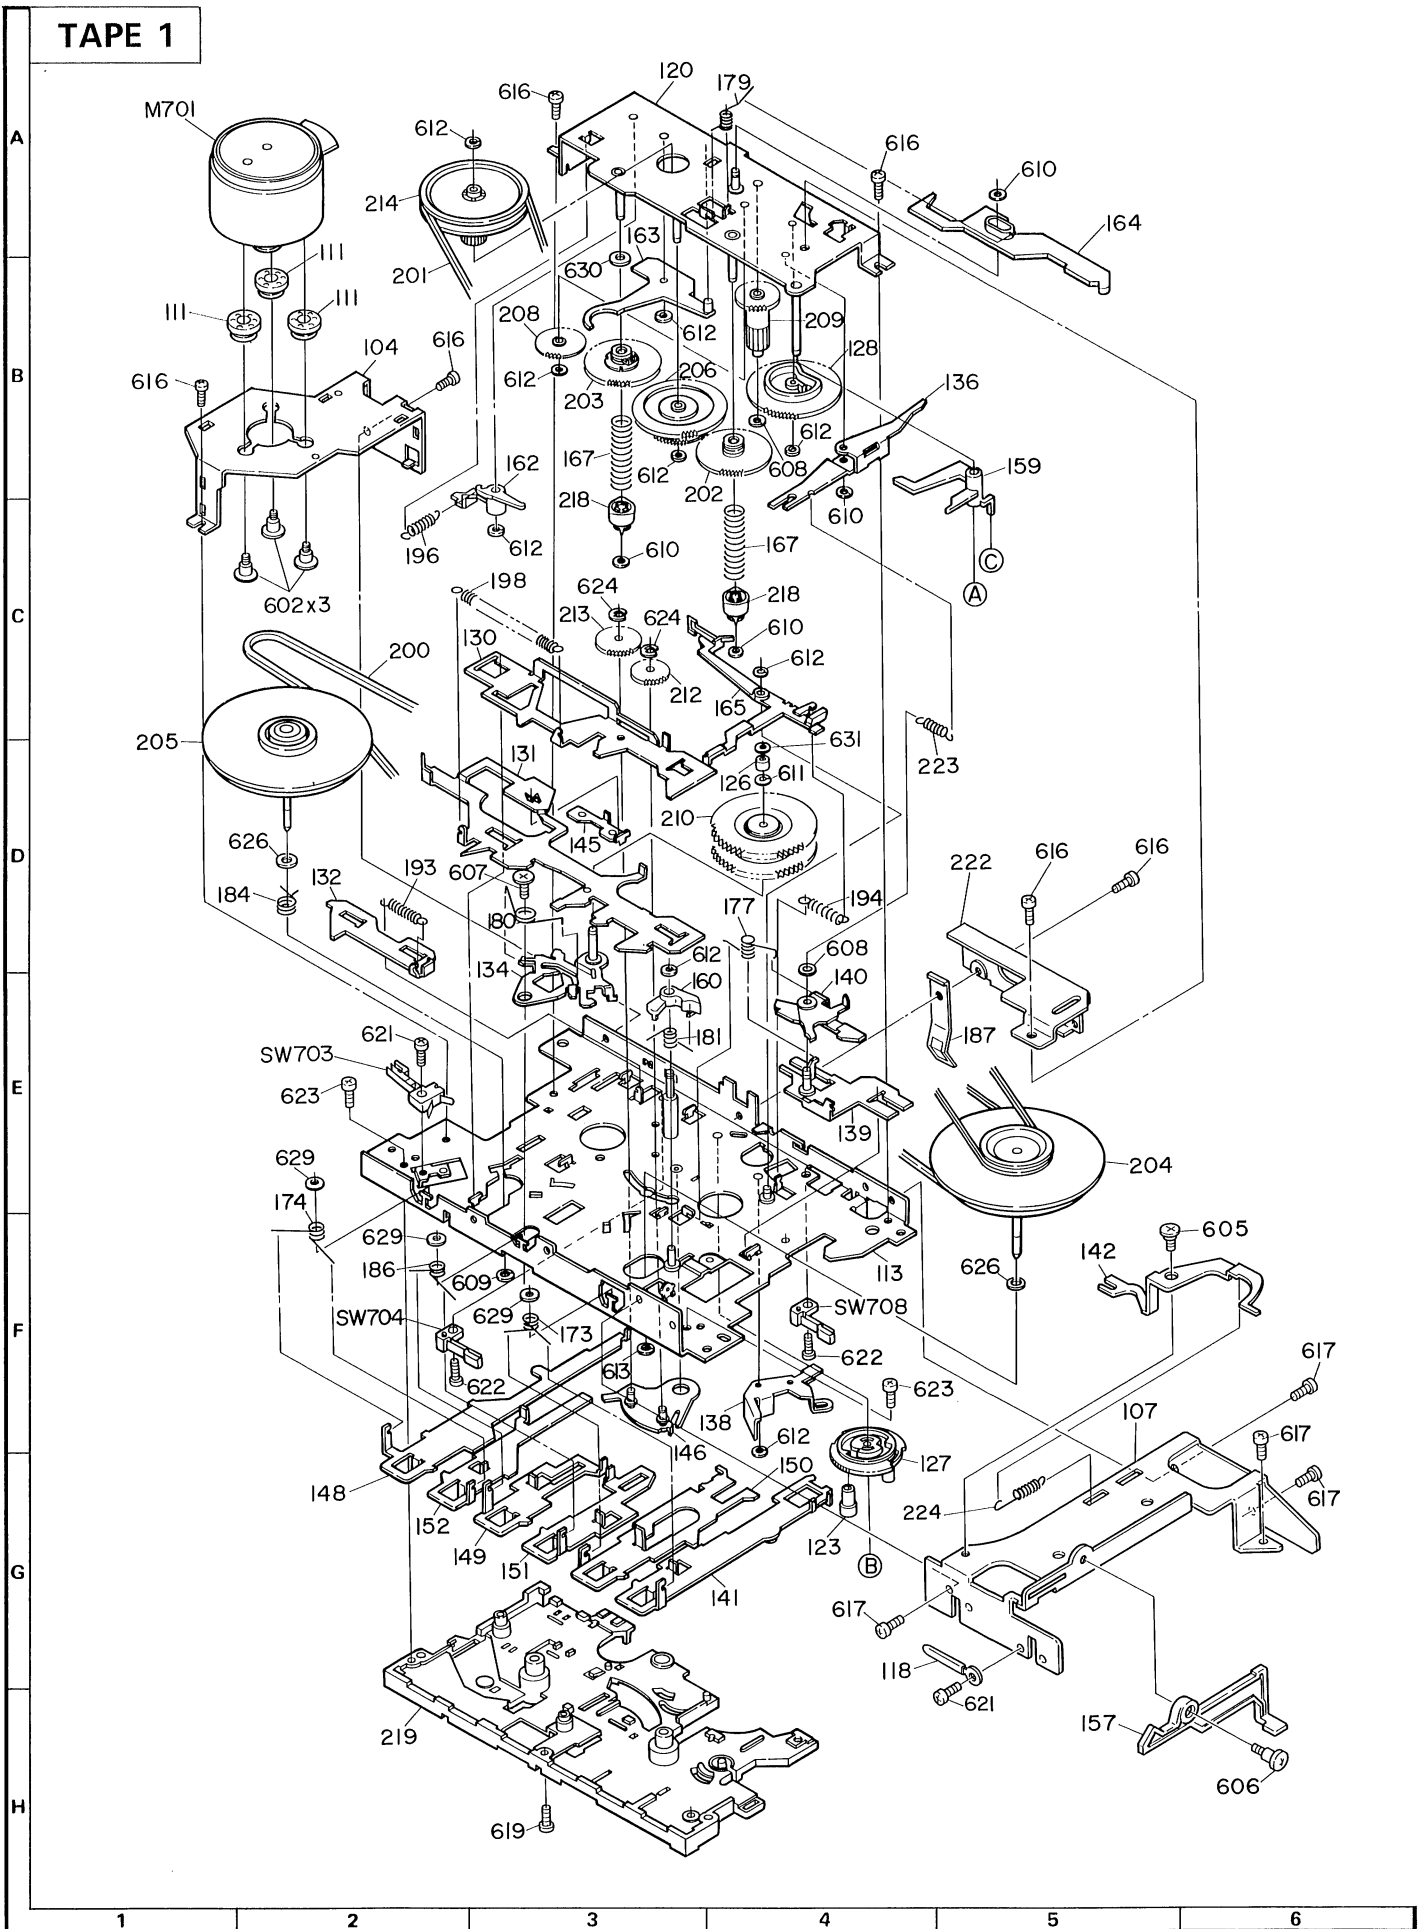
TAPE MECHANISM EXPLODED VIEW (2/4)
